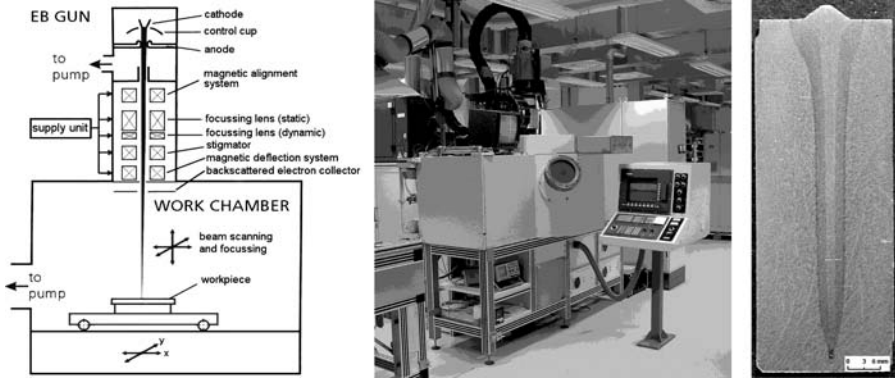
Left:* electron beam welding machine, schematic. *Middle:* e-beam welding system, max. beam power 10 kW, $U_B = 60$ kV. *Right:* in-depth welding seam, 63 mm deep, 2 mm wide
